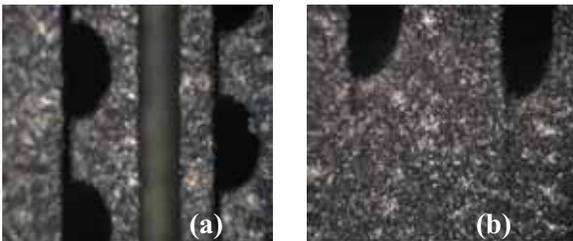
Photographs of (a) cross section and (b) brazed part of assembly of microchanneled stainless steel plates.
